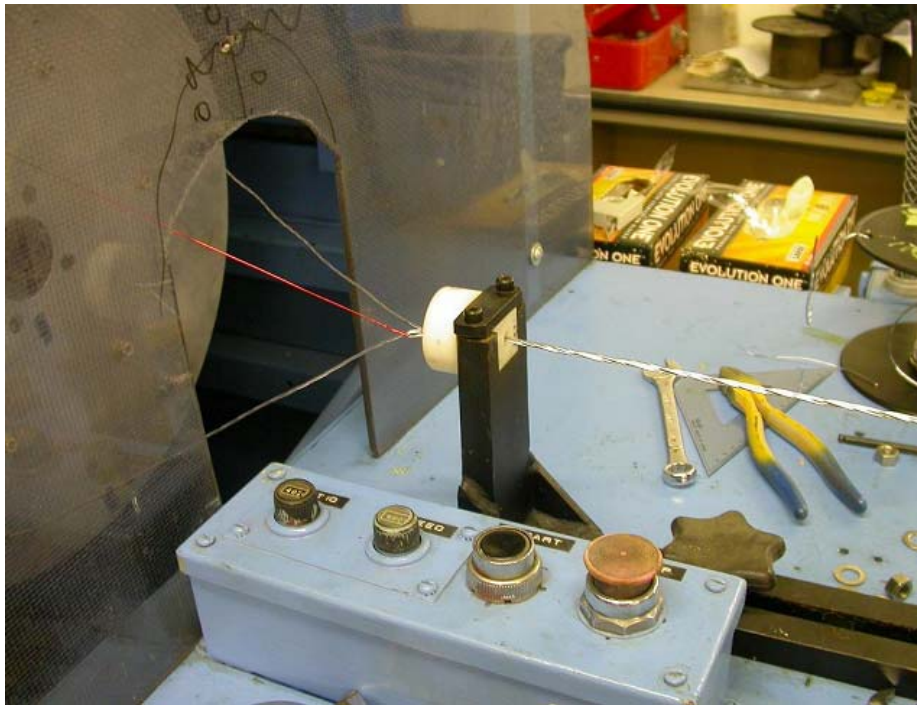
The copper leader helps to indicate a stop of the machine once a spool is finished.
